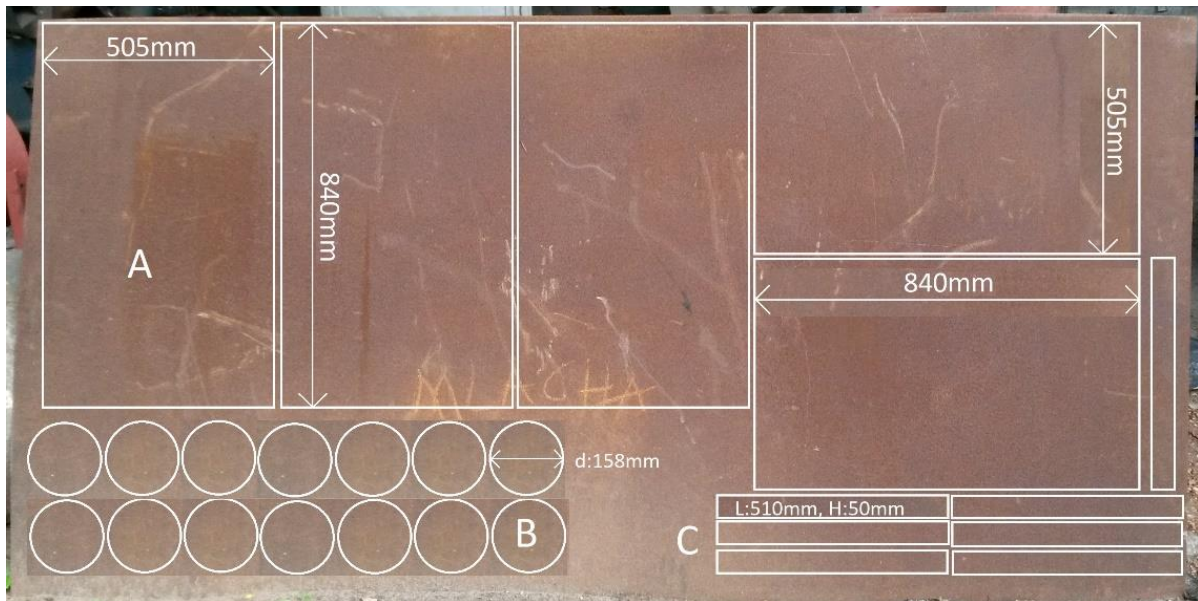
Overview of the pieces required to build the seven lids and five tubes (an extra sheet will be required to build two extra tubes).
